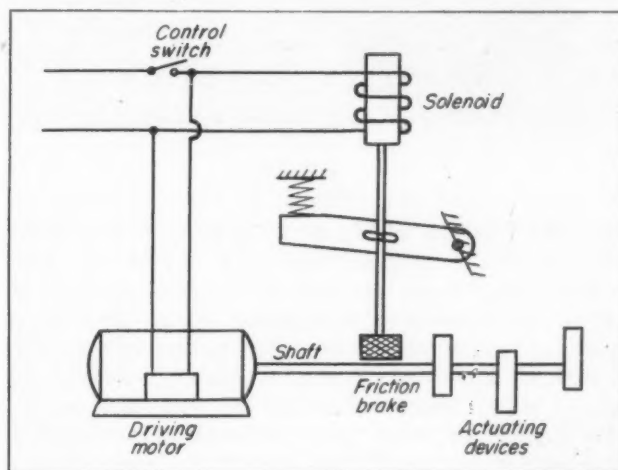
Right—Above—Electromagnetically operated friction brake. Solenoid keeps friction brake disengaged while motor is operating
